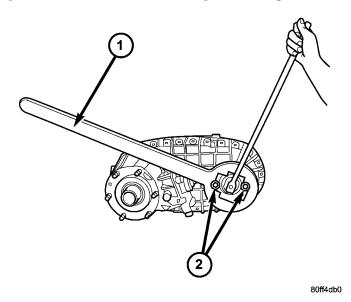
Remove Companion Flange Nut - Typical 1 - HOLDER 6719 2 - BOLTS
